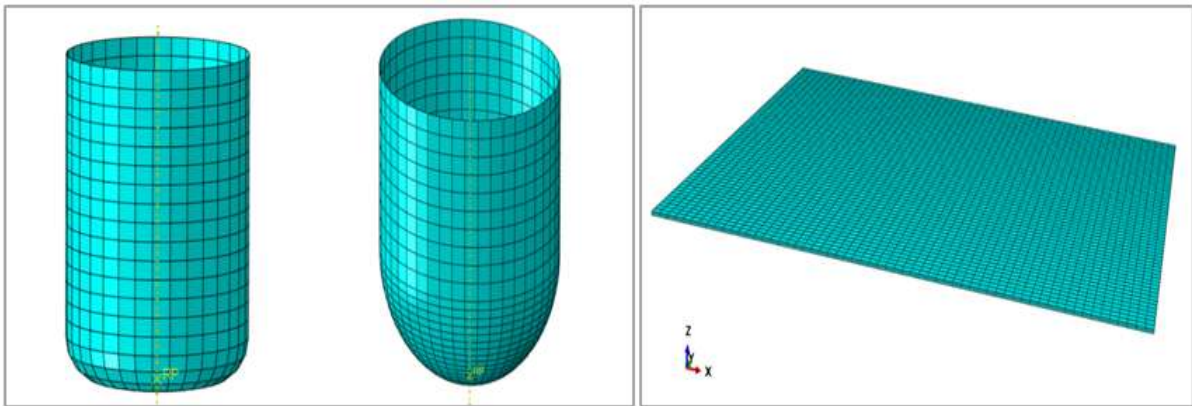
Meshing of some types used of tools and workpiece in SPIF.
